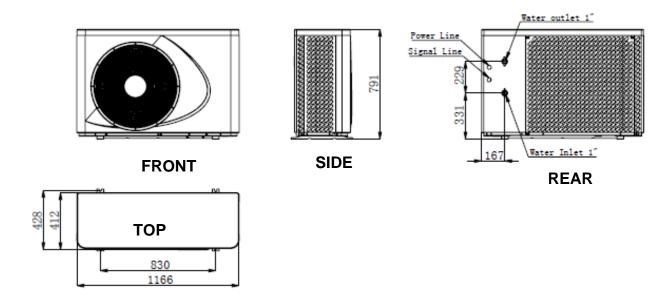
AS01-R290 Casing Dimensions & Heating Connection Locations
